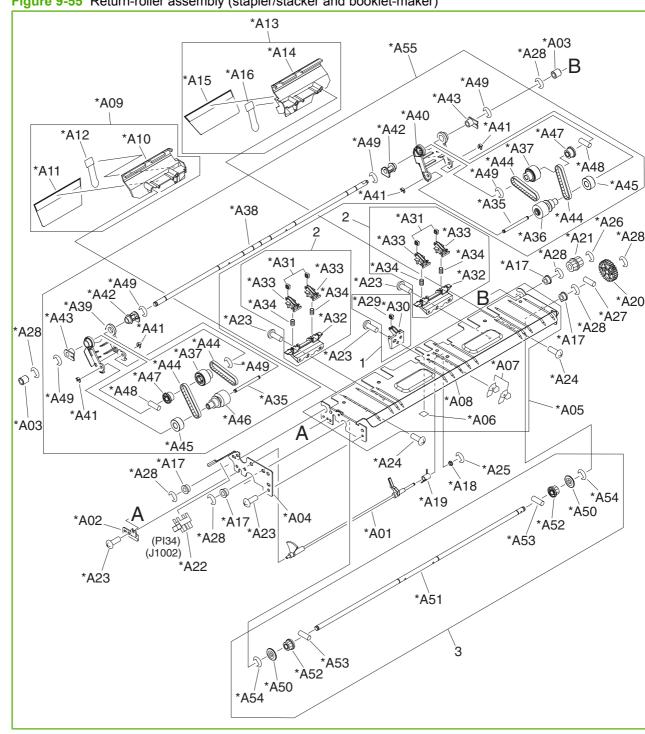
Return-roller assembly (stapler/stacker and booklet-maker)
